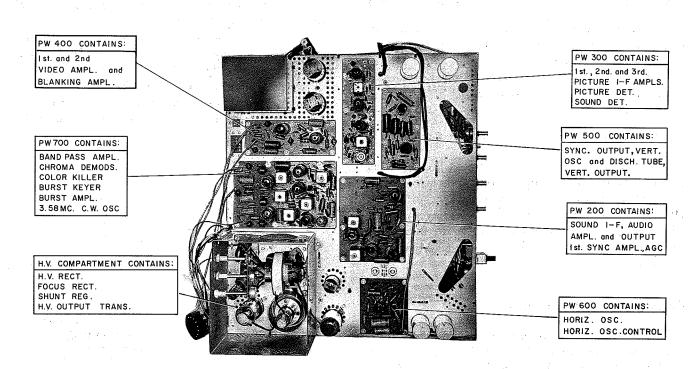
Top View-CTC5 Chassis, Showing Circuit and Printed Circuit Board Locations.
